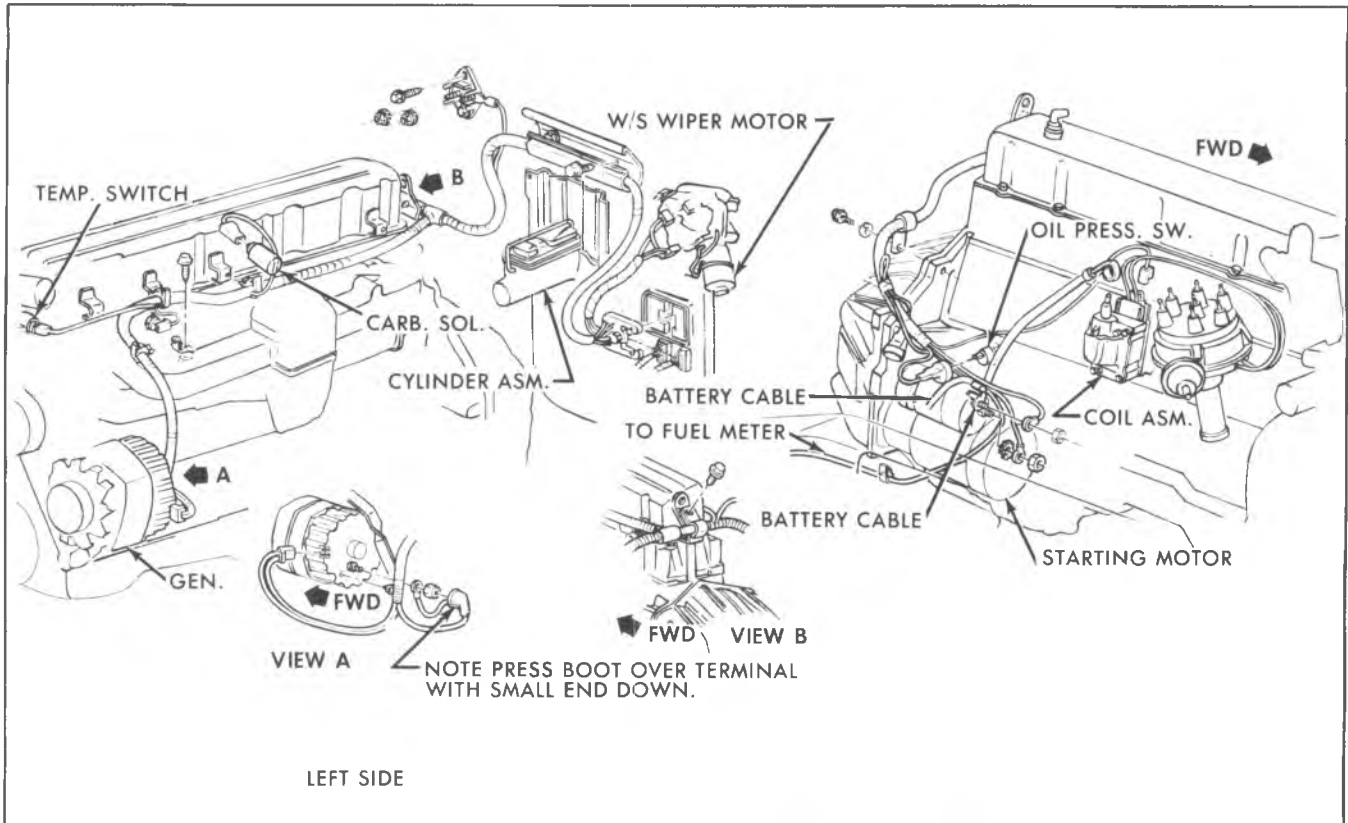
C-10 (03) w/F44, C-10 (06) & (16) and K-10 L-6 (LD4) Engine Wiring
